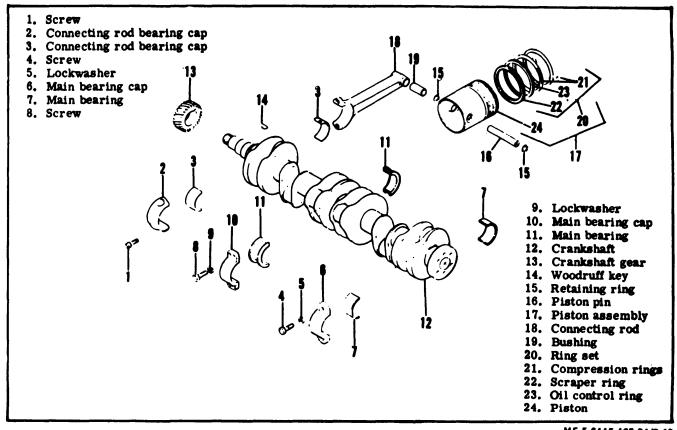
Crankshaft, connecting rods and pistons, exploded view.
